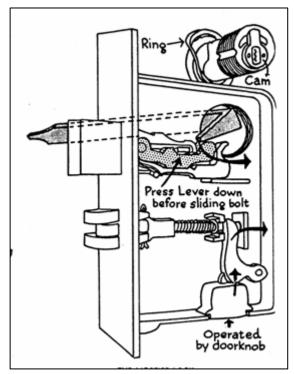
Mortise Lock: Remove ring and cylinder, press lever down with key tool before sliding the bolt, turn doorknob
